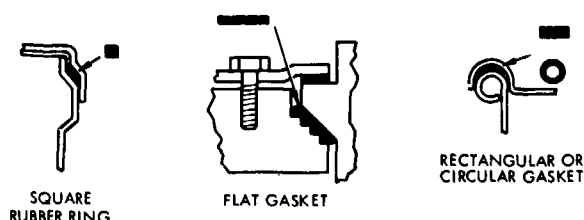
Special Cavity Joints for Nonmetallic Gaskets
